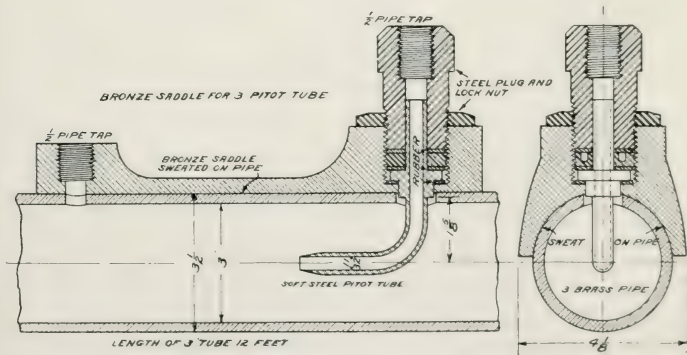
SECTIONAL VIEW OF THE OLIPHANT PITOT TUBE
